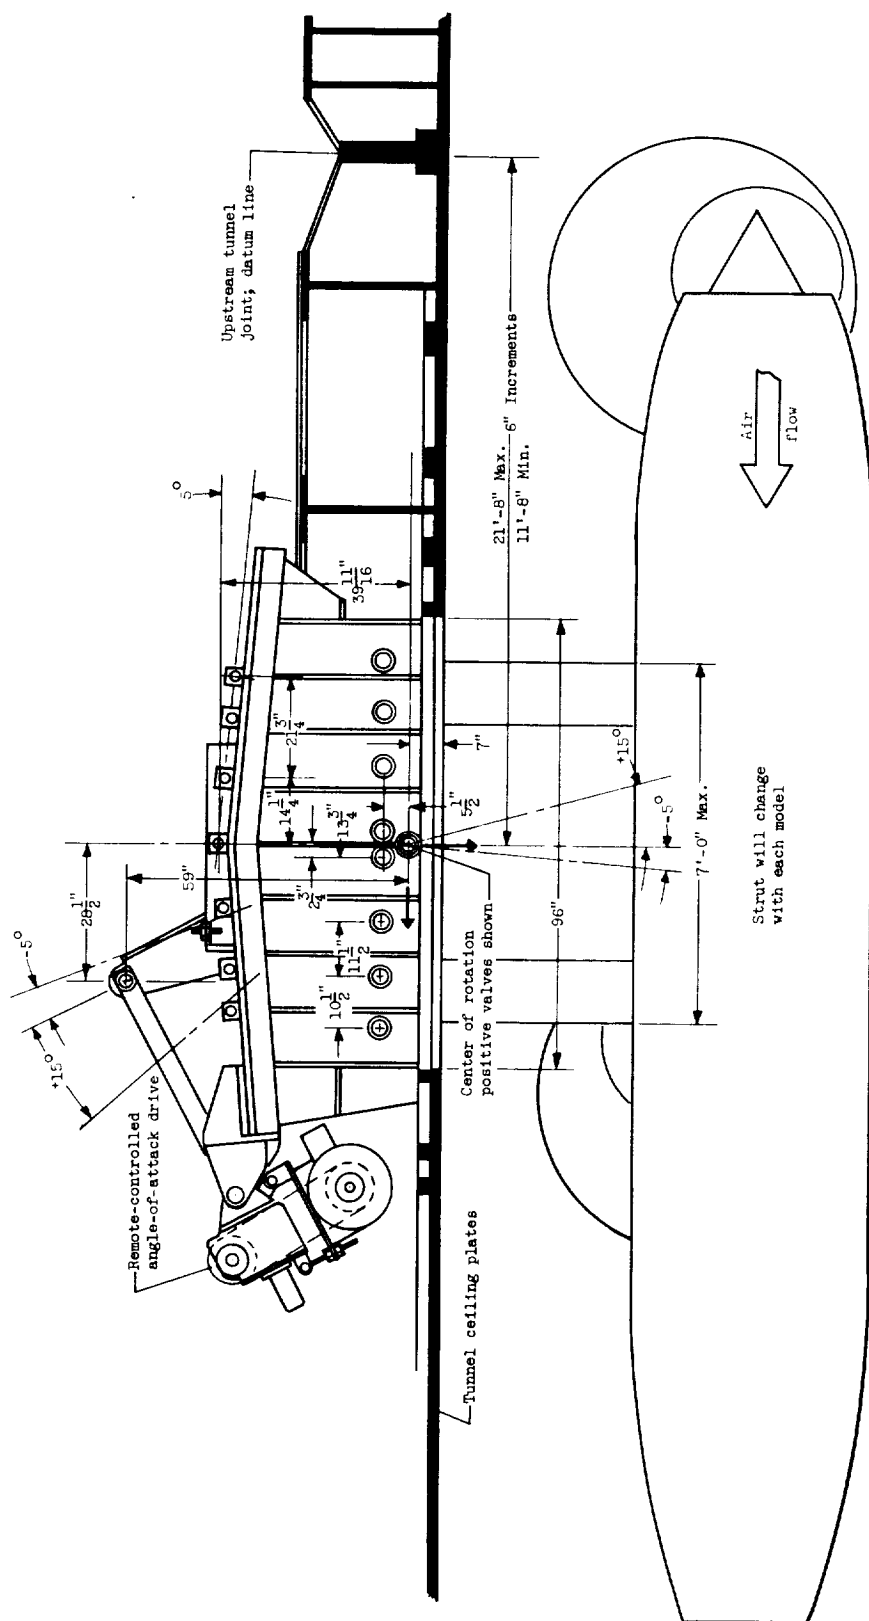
Sting-mounted model strut, Lewis Unitary Plan Wind Tunnel.
